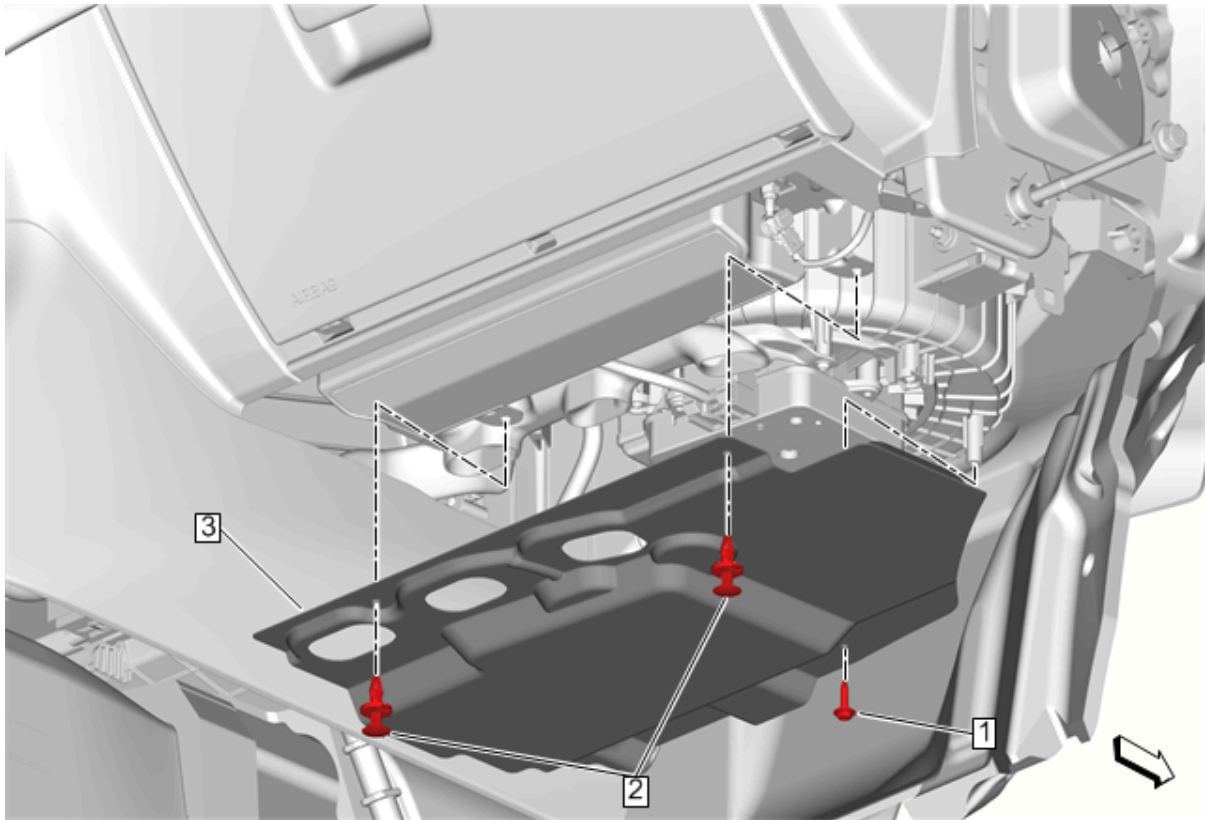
Instrument Panel Lower Trim Panel Insulator
